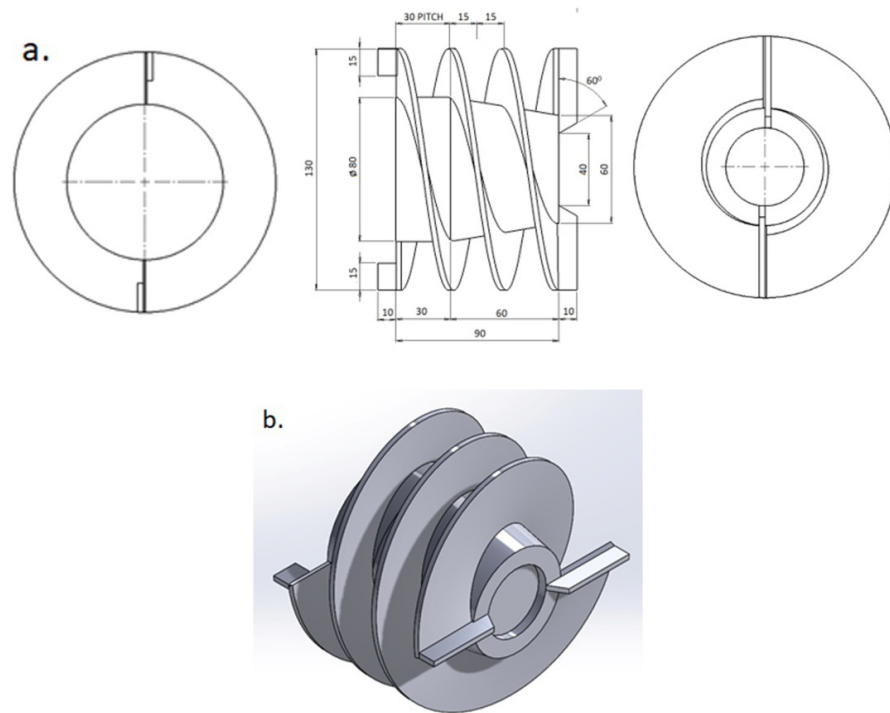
The twin starts helical rotor (a) geometric parameters (b) isometric view.
